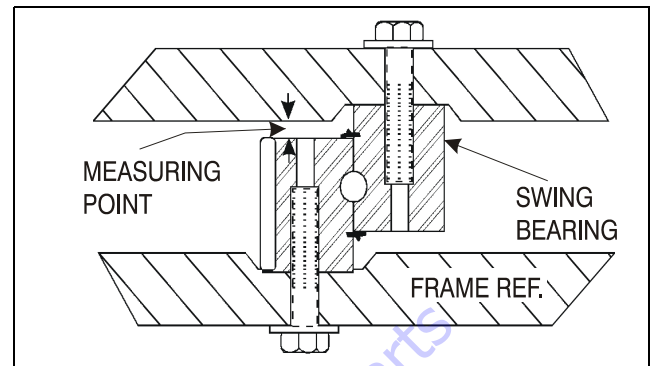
Swing Bearing Tolerance Measuring Point
